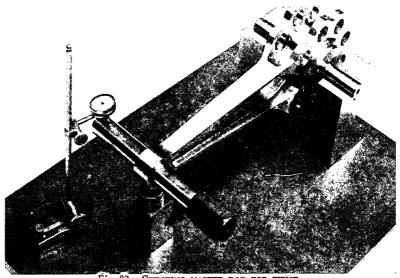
CHECKING MASTER ROD FOR TWIST.
